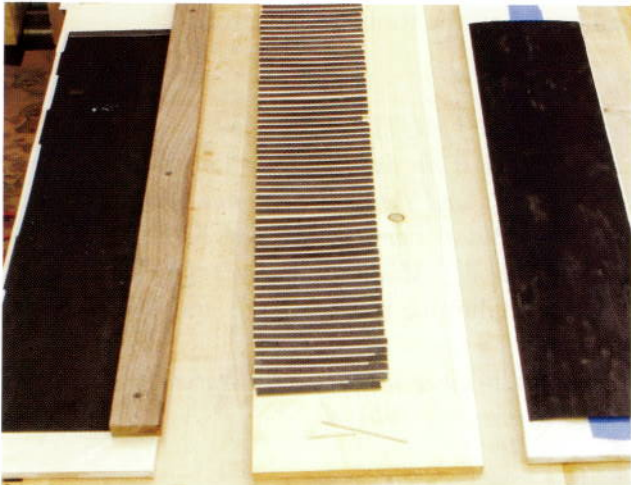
Angle block (walnut) is clamped to the workpiece, indexed to the scribe line
